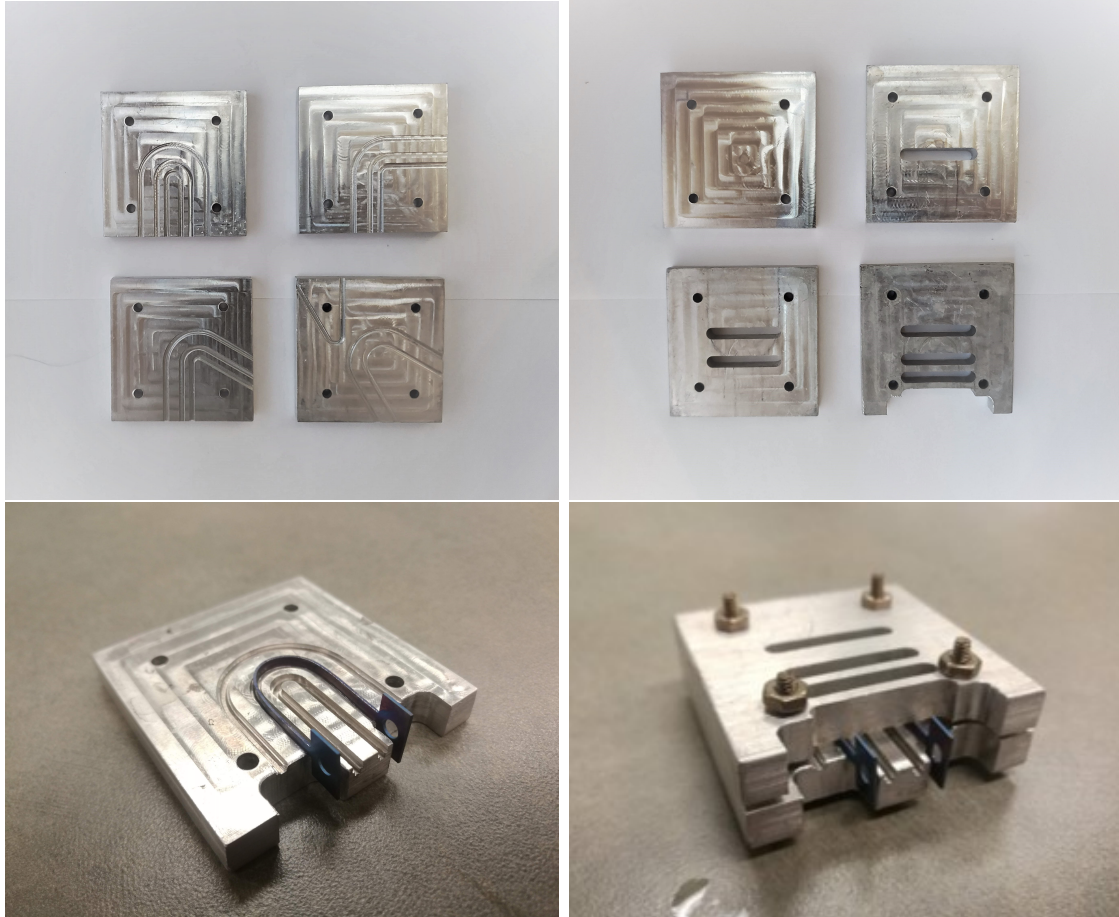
Annealing molds. Clockwise from top left: Mold bases, mold lids, assembled mold with actuator, mold base with inset actuator at 180° turn.
